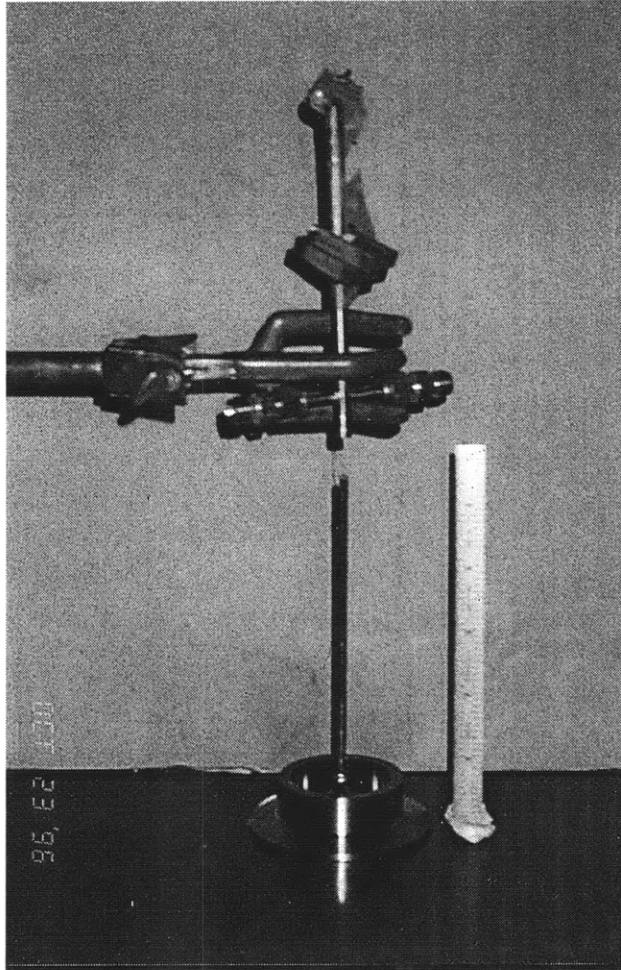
b. Assembly of the needle tube Prototype I. The inner tube has been welded to the flange base. The outer tube is about to be mounted. The thermocouple  $T_{\text{target}}$  is being attached.
